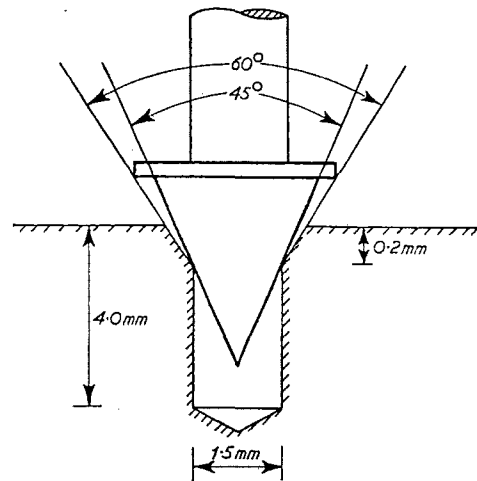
Detail of gauge point and gauge hole for the sectioning method
